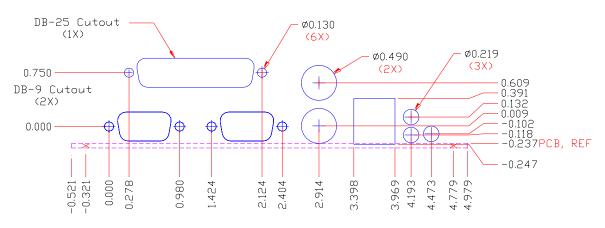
CBL-8003 and CBR-8005 Dimensions and Mounting
